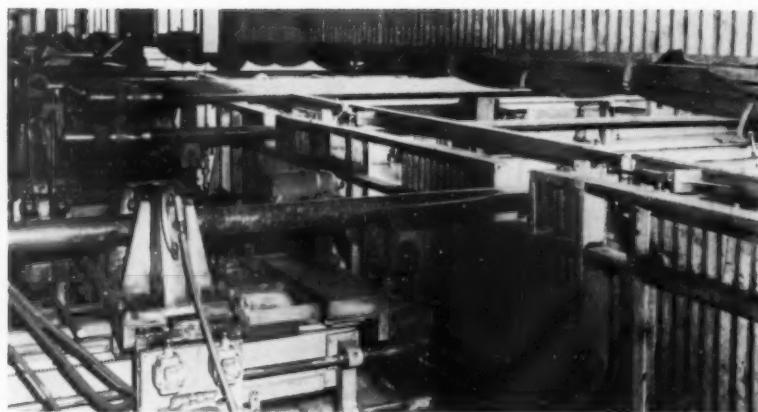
Slot in wall of building. Outer end of pipe is on rack; inner end is supported in position for machining.
